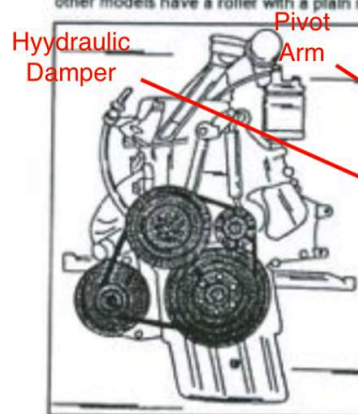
Layout of the drive belt when a power-assisted steering is fitted.
